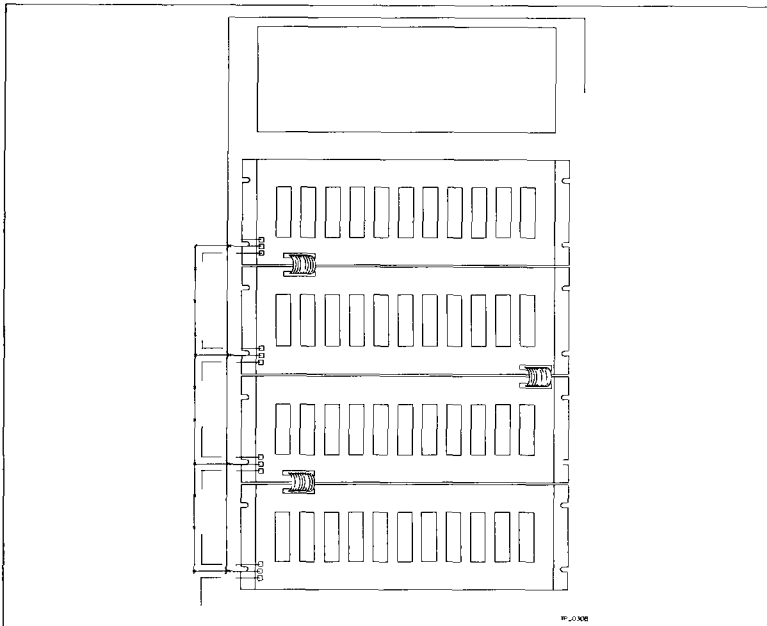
9 Connecting Cables to Multiple Module Mounting Units
